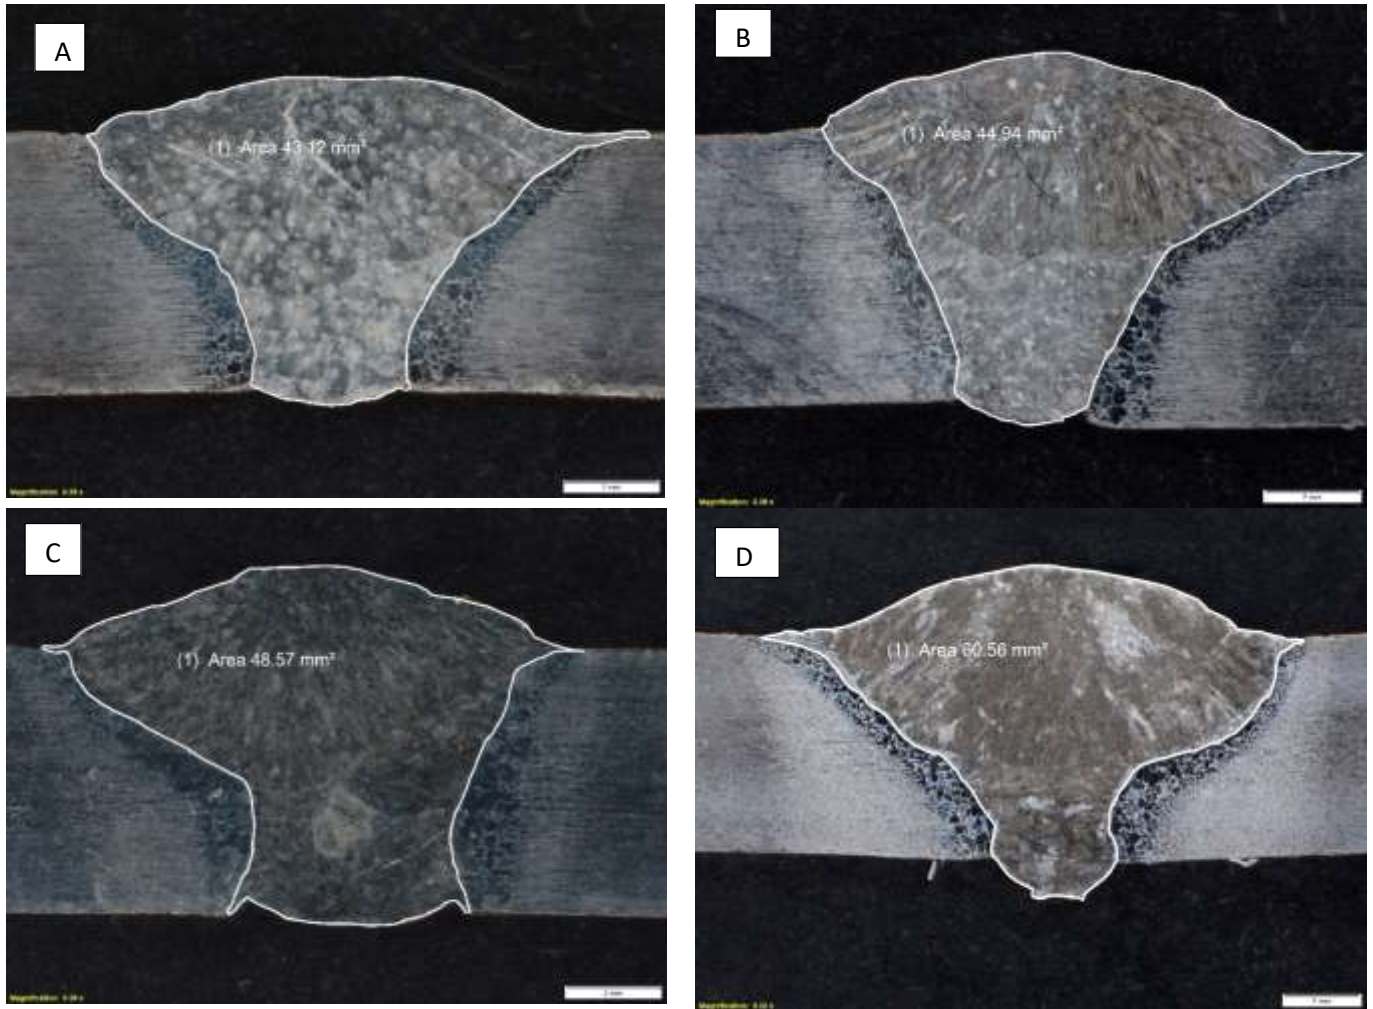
Macroscopic view of the welded joint cross section area of the measured weld beard of a) 10L/min, (b) 15L/min, (c) 20L/min and (d) 25L/min.
